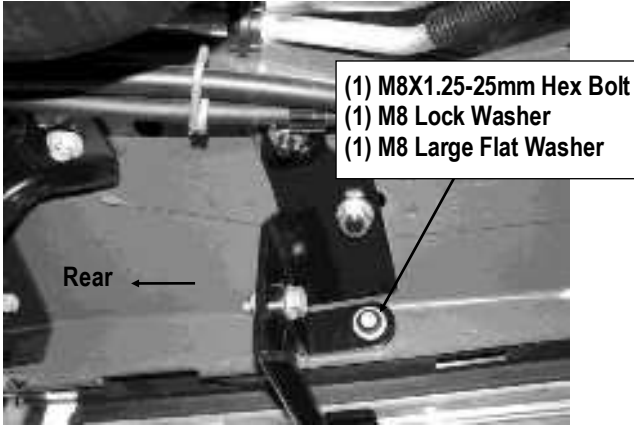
Mark & Drill A Hole On The Pinch Weld According To The Driver Rear Support Bracket Location
